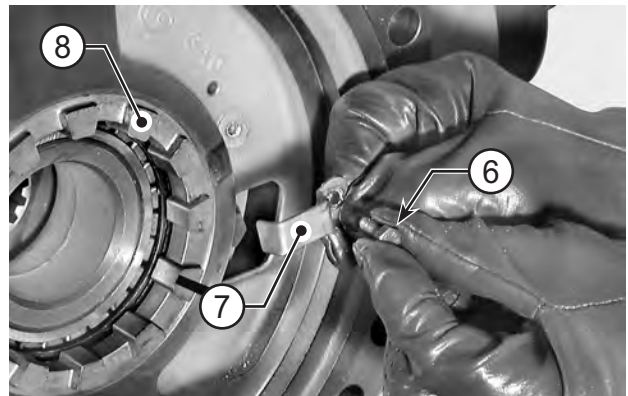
Remove screws (6) and safety stops (7) from adjustment ring nuts (8).
